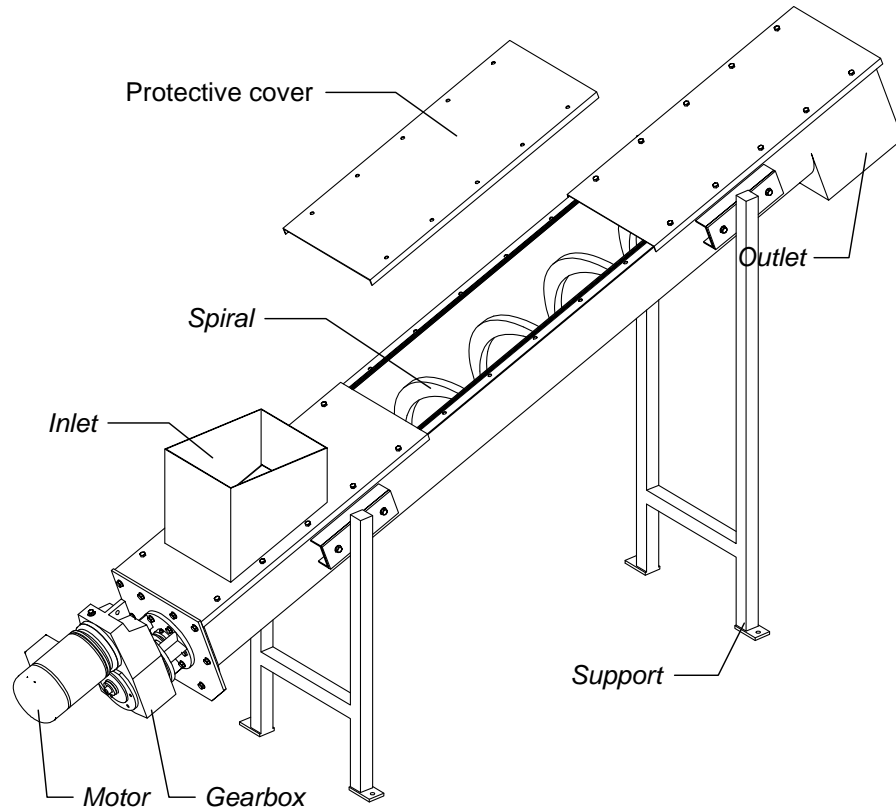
Principal Parts of a Horizontal or Lightly Inclined Spiral Conveyor
